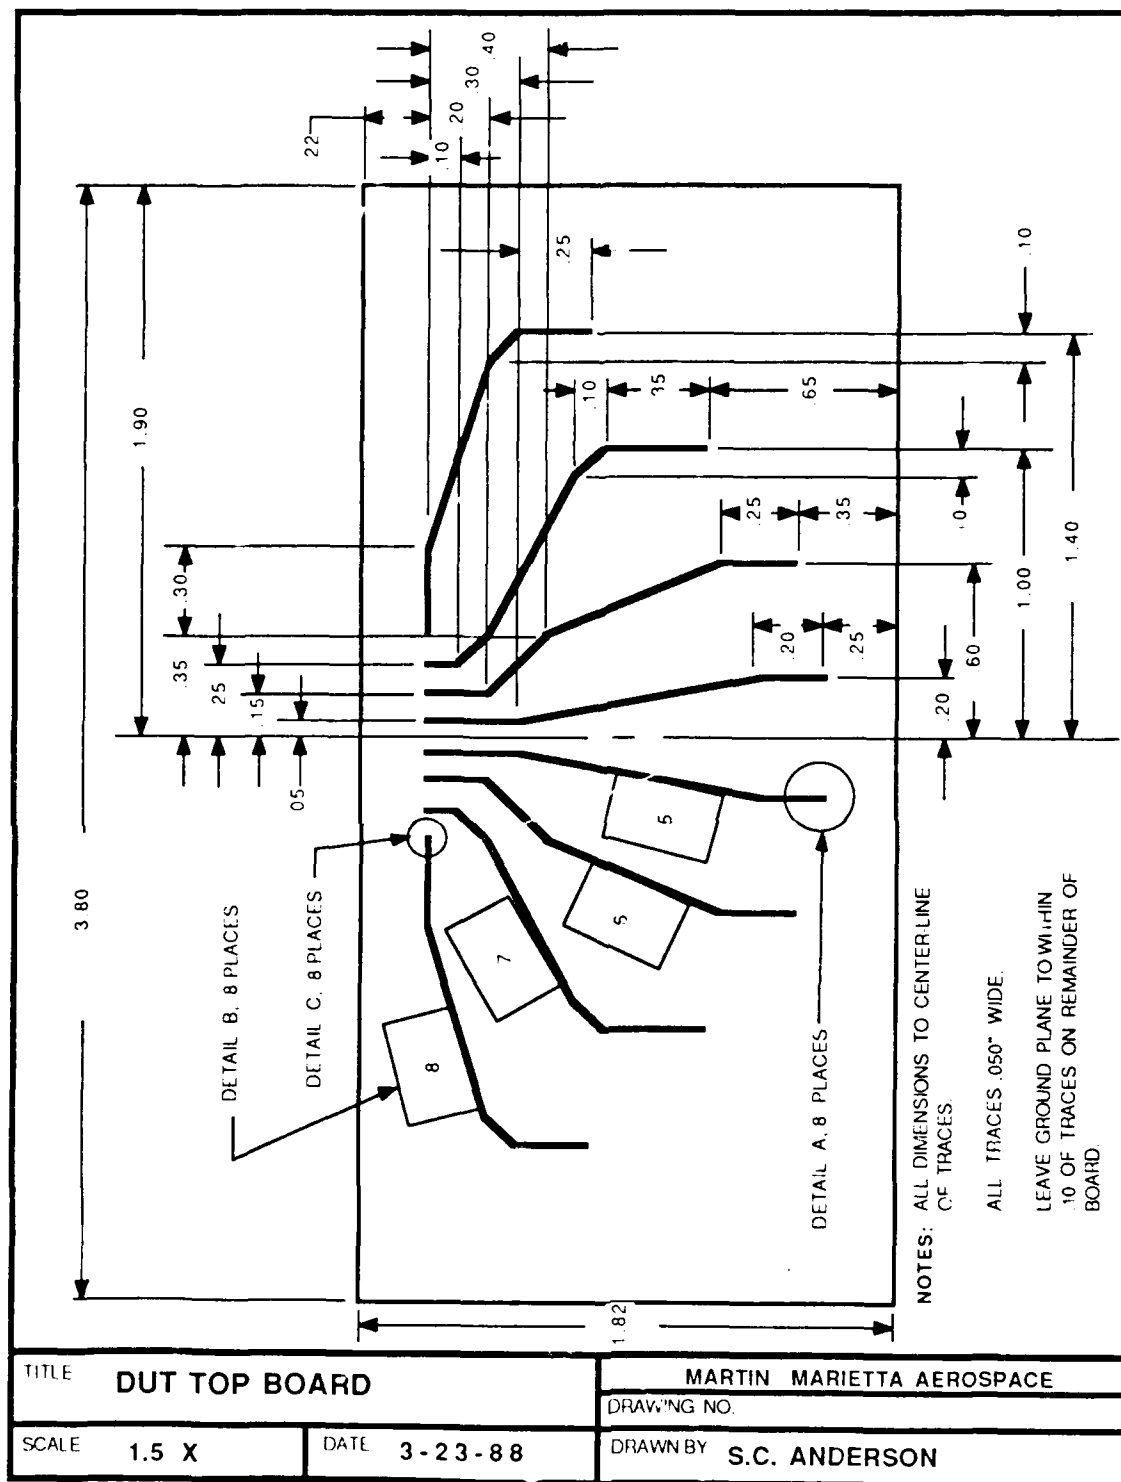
Test Fixture Top Board Shop Drawing
